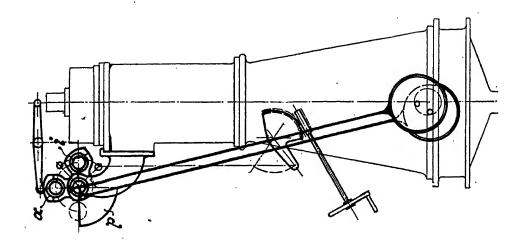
Nobel's arrangement for reversing Four-cycle Engines without reversing the Cam Shaft.
